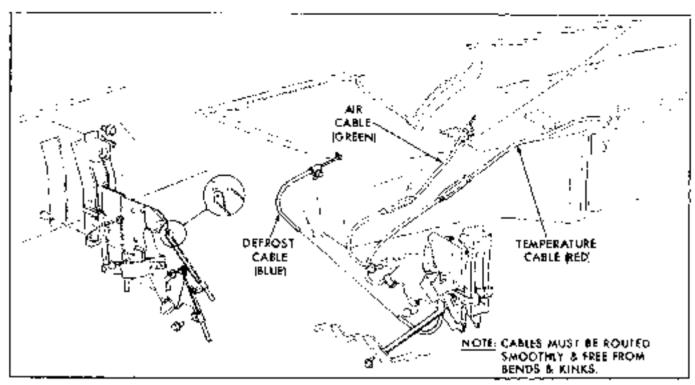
Control Pane and Cable Rooting-Tempest
